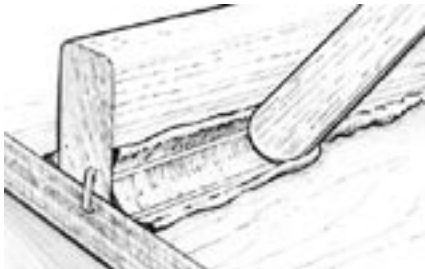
Shape and smooth the fillet with a rounded tool.
